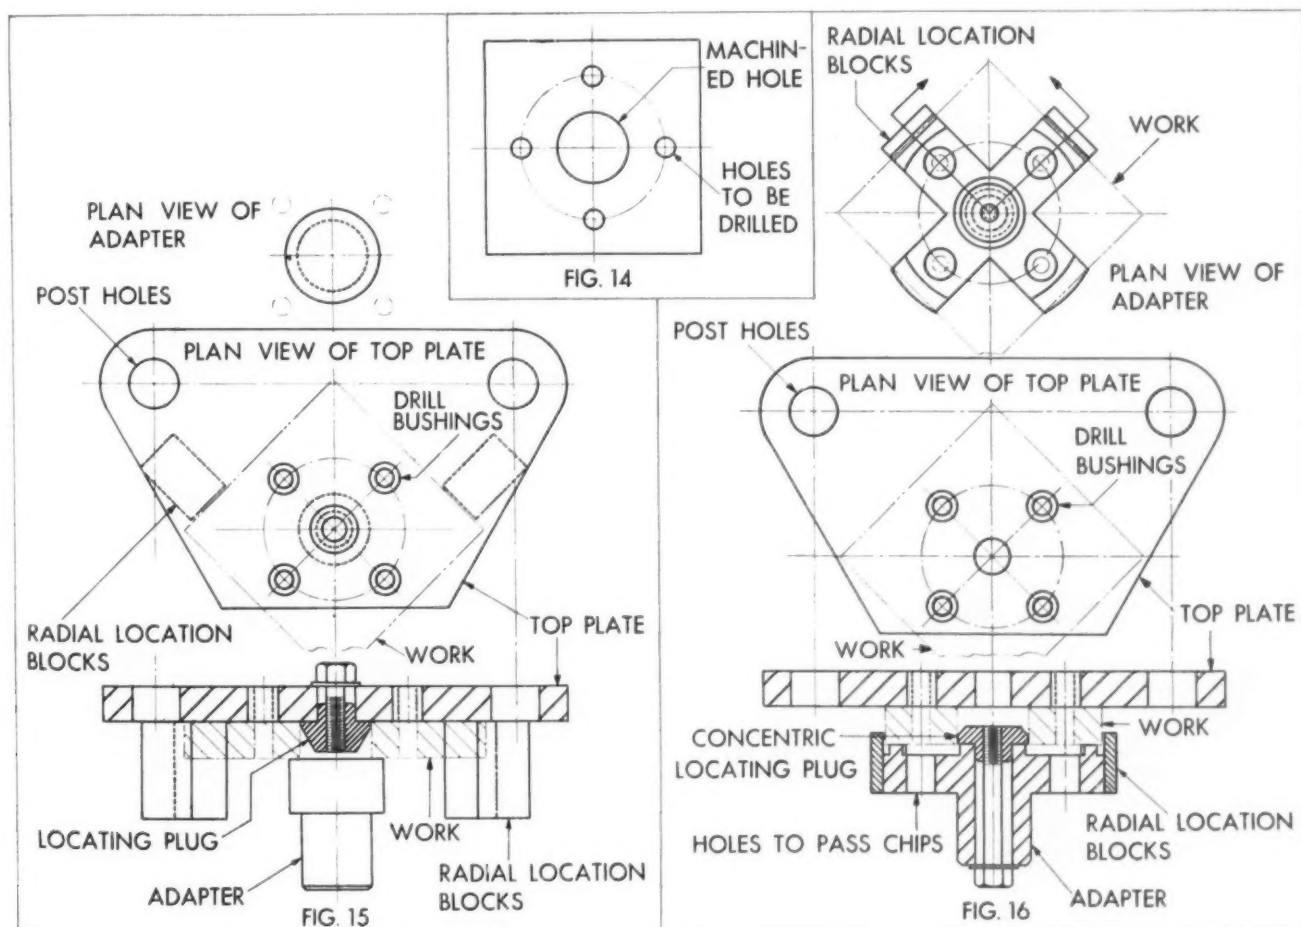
Work that Requires Concentric and Radial Locating Means. Fig. 15. Top Plate and Adapter for Locating Part Shown in Fig. 14 from Top Plate. Fig. 16. Top Plate and Adapter when Work Shown in Fig. 14 is Located from the Adapter
